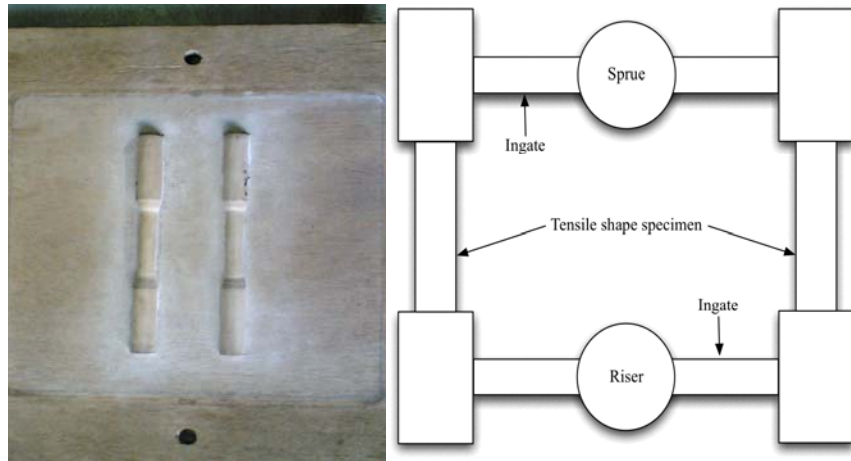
Showing (a) wooden pattern and (b) position of the tensile specimens in the mould.
